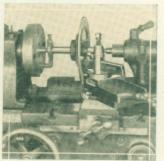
Truing a Clutch Disc Mounted on an Arbor
